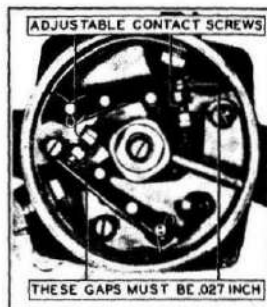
The timer contact points must be correctly adjusted to produce proper ignition.
